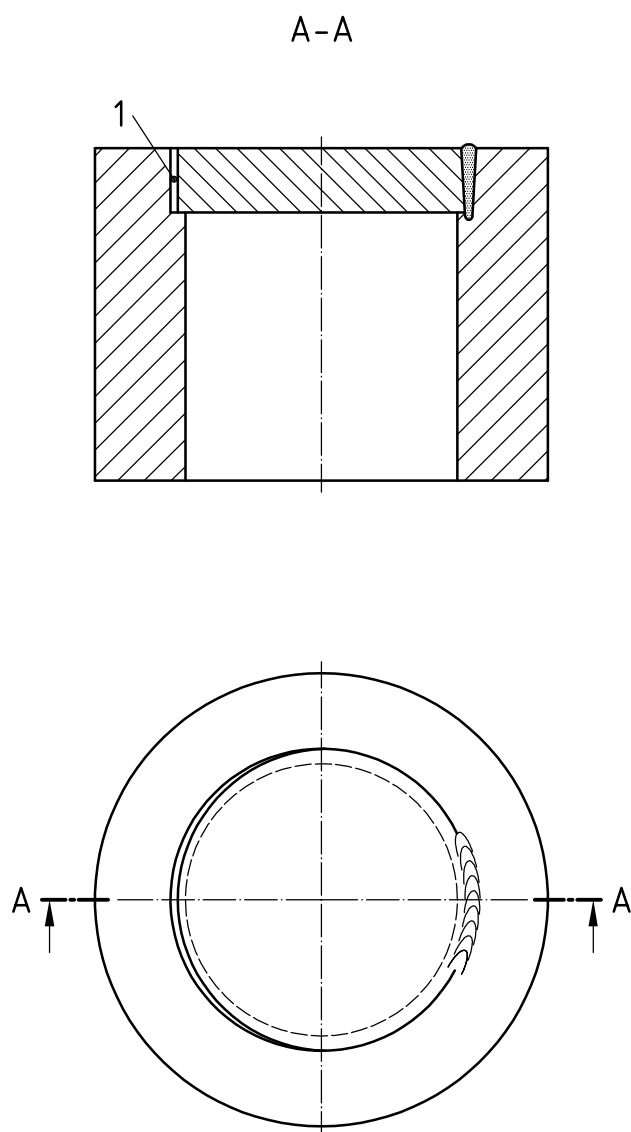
Improved joint detail for axial welds with reduced stress concentration
